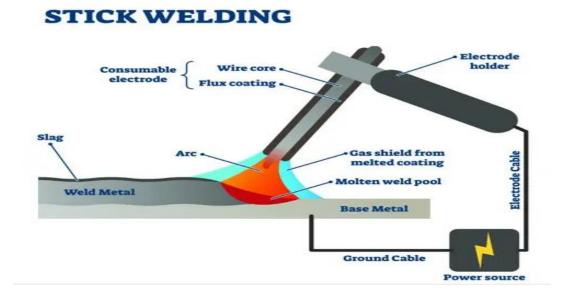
5 - Shielded Metal Arc Welding Process. [E]
